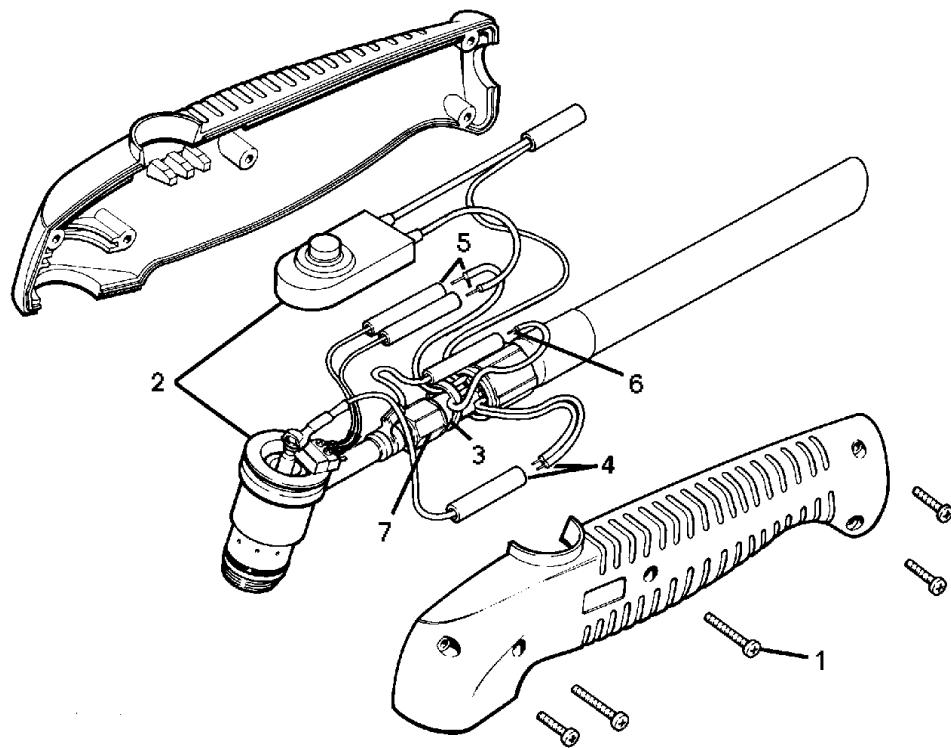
PAC100/110 Torch Repair Kit Installation
